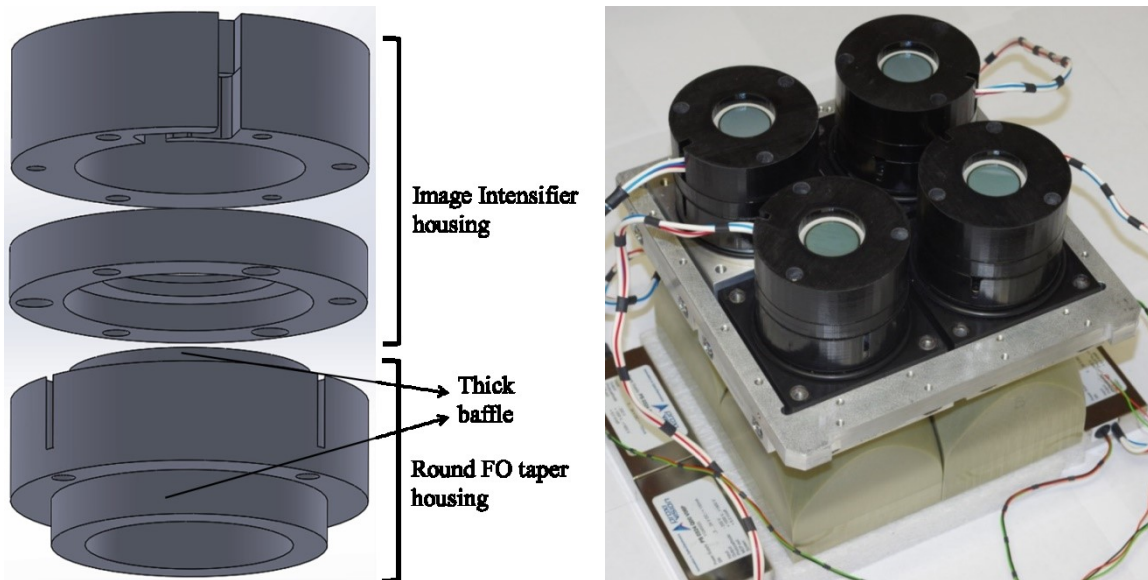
Left: SOLIDWORKS rendering of the designed baffle-embedded housing for the round FO taper and image intensifier assembly. Right: 3D-printed housing installed on the round FO tapers and image intensifiers and integrated on the square FO tapers.
